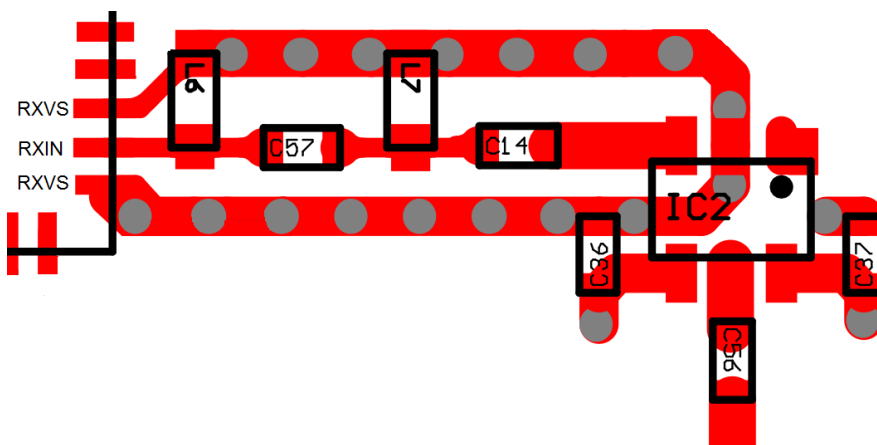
Top PCB layer with RX path, guard ring and RF switch
